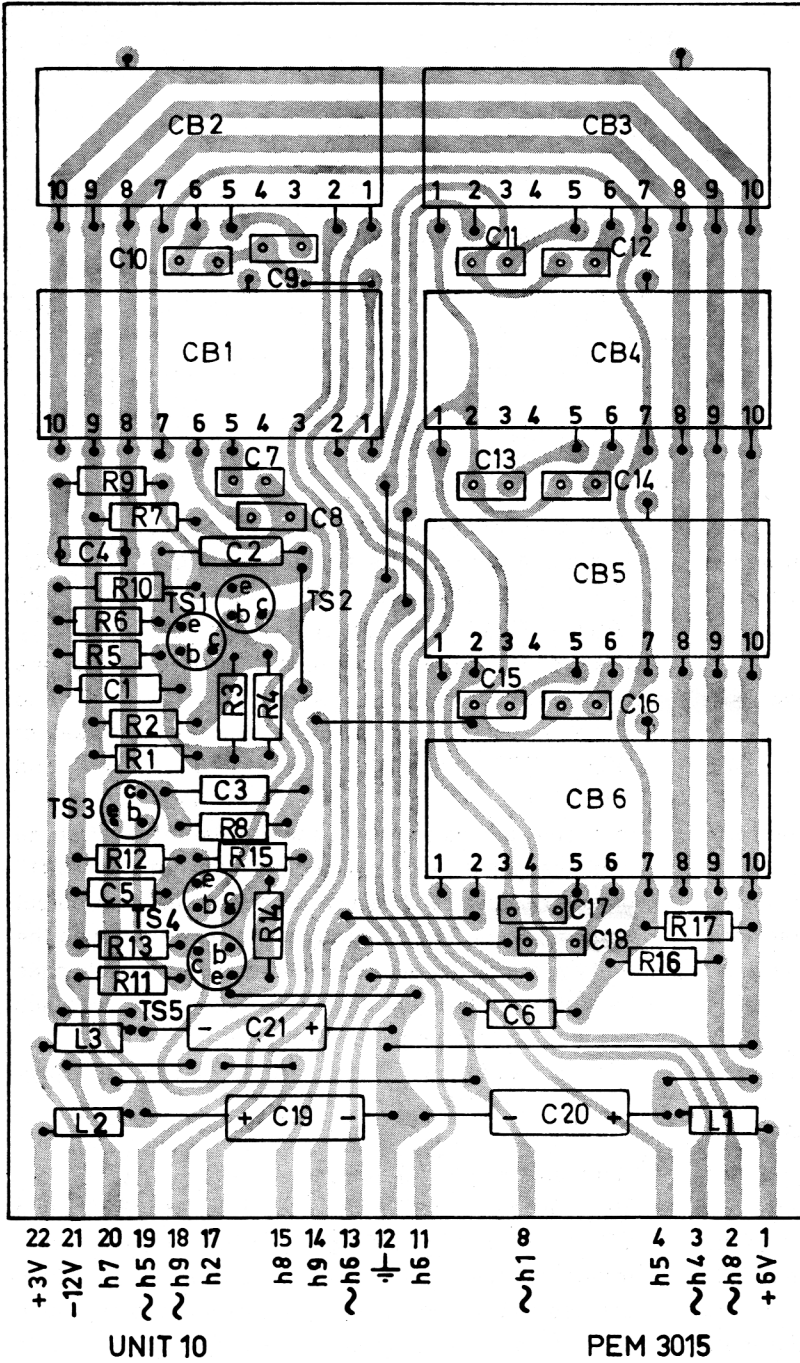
Printed wiring board, horizontal divider, Unit 10
